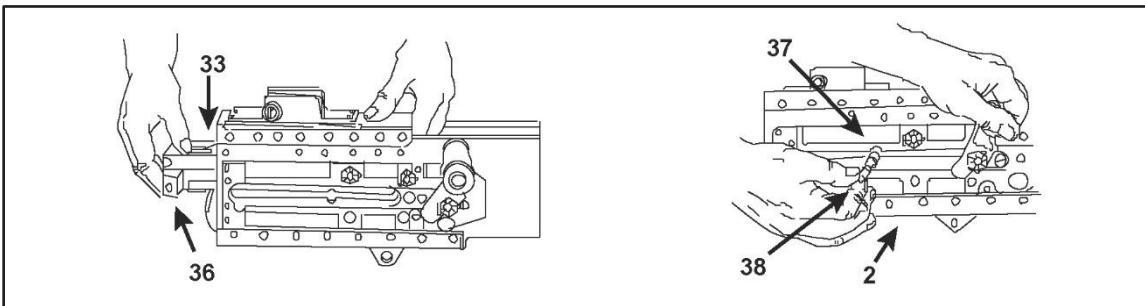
Attaching the barrel buffer and barrel extension assemblies
